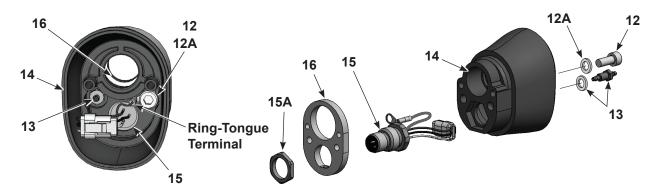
Tube-Mount Spray Gun Disassembly 5 of 5
